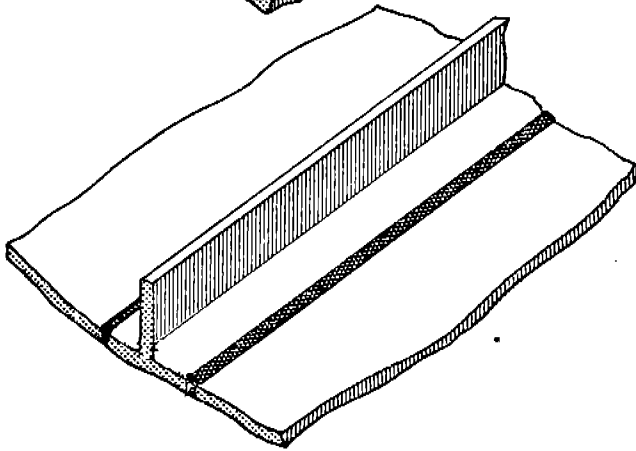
DITCH TYPE CRACK ARRESTER
